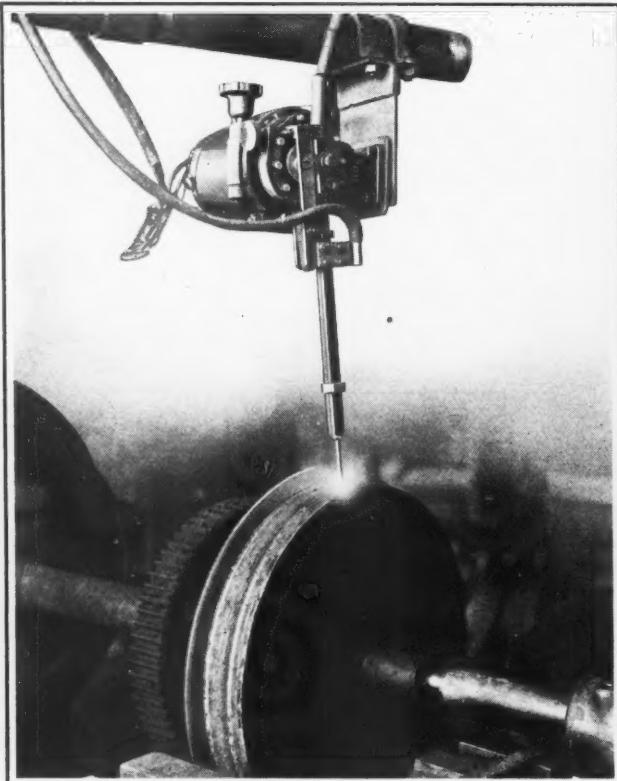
Building up Tread of Mining-car Wheel with an Automatic Welding Head
